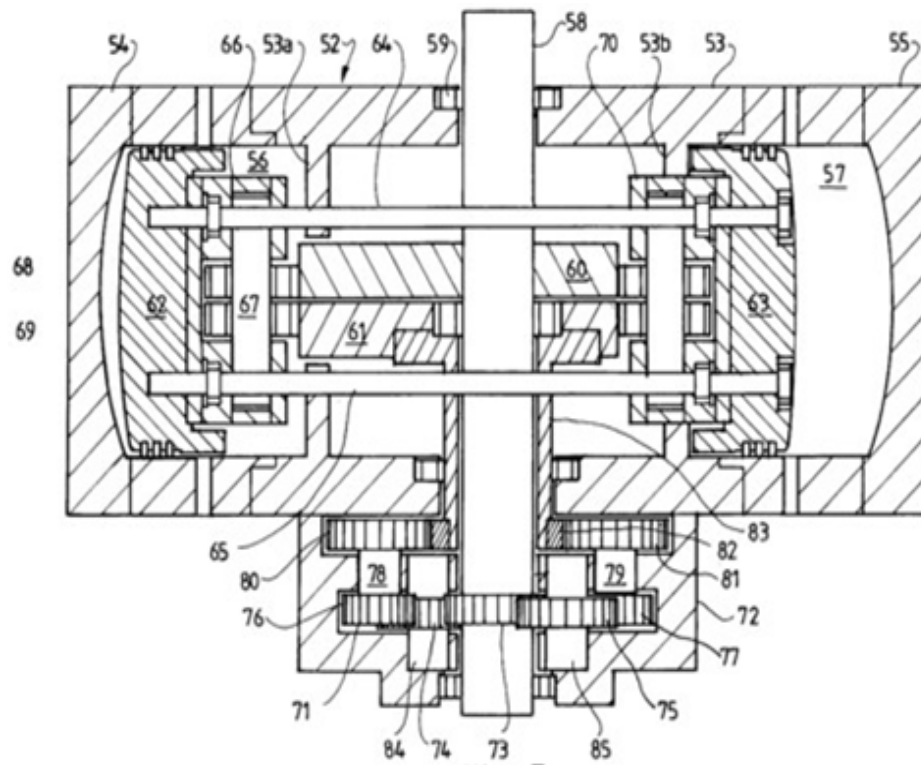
Cross-sectional view of another two-stroke engine comprising a single cylinder module with the cross-section being in the plane of the central shaft of the engine.
